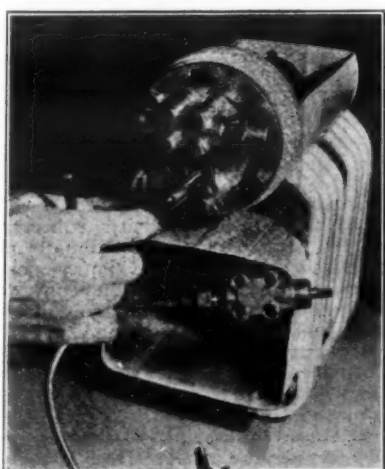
Assembly of the cartridge needle for the test described in Fig. 4.
